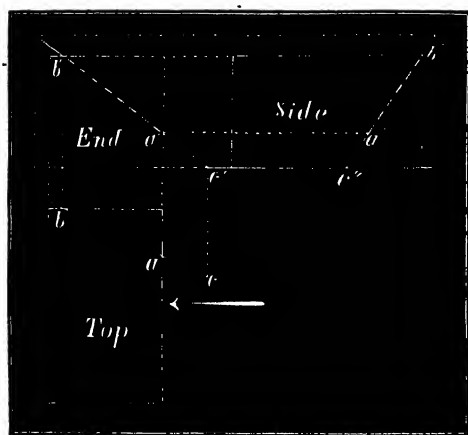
PROJECTION DRAWINGS OF A CHALK BOX AND ROD.
